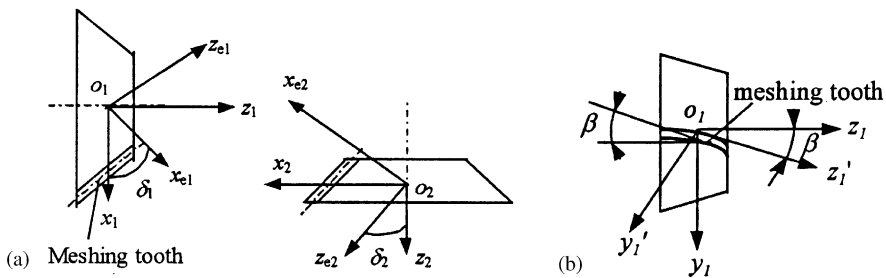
A pair of spiral bevel gears and a spiral profile tooth.
